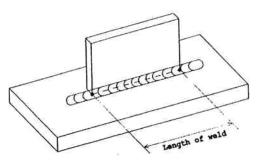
(a) When Weld Bead Extends along Weld Line
